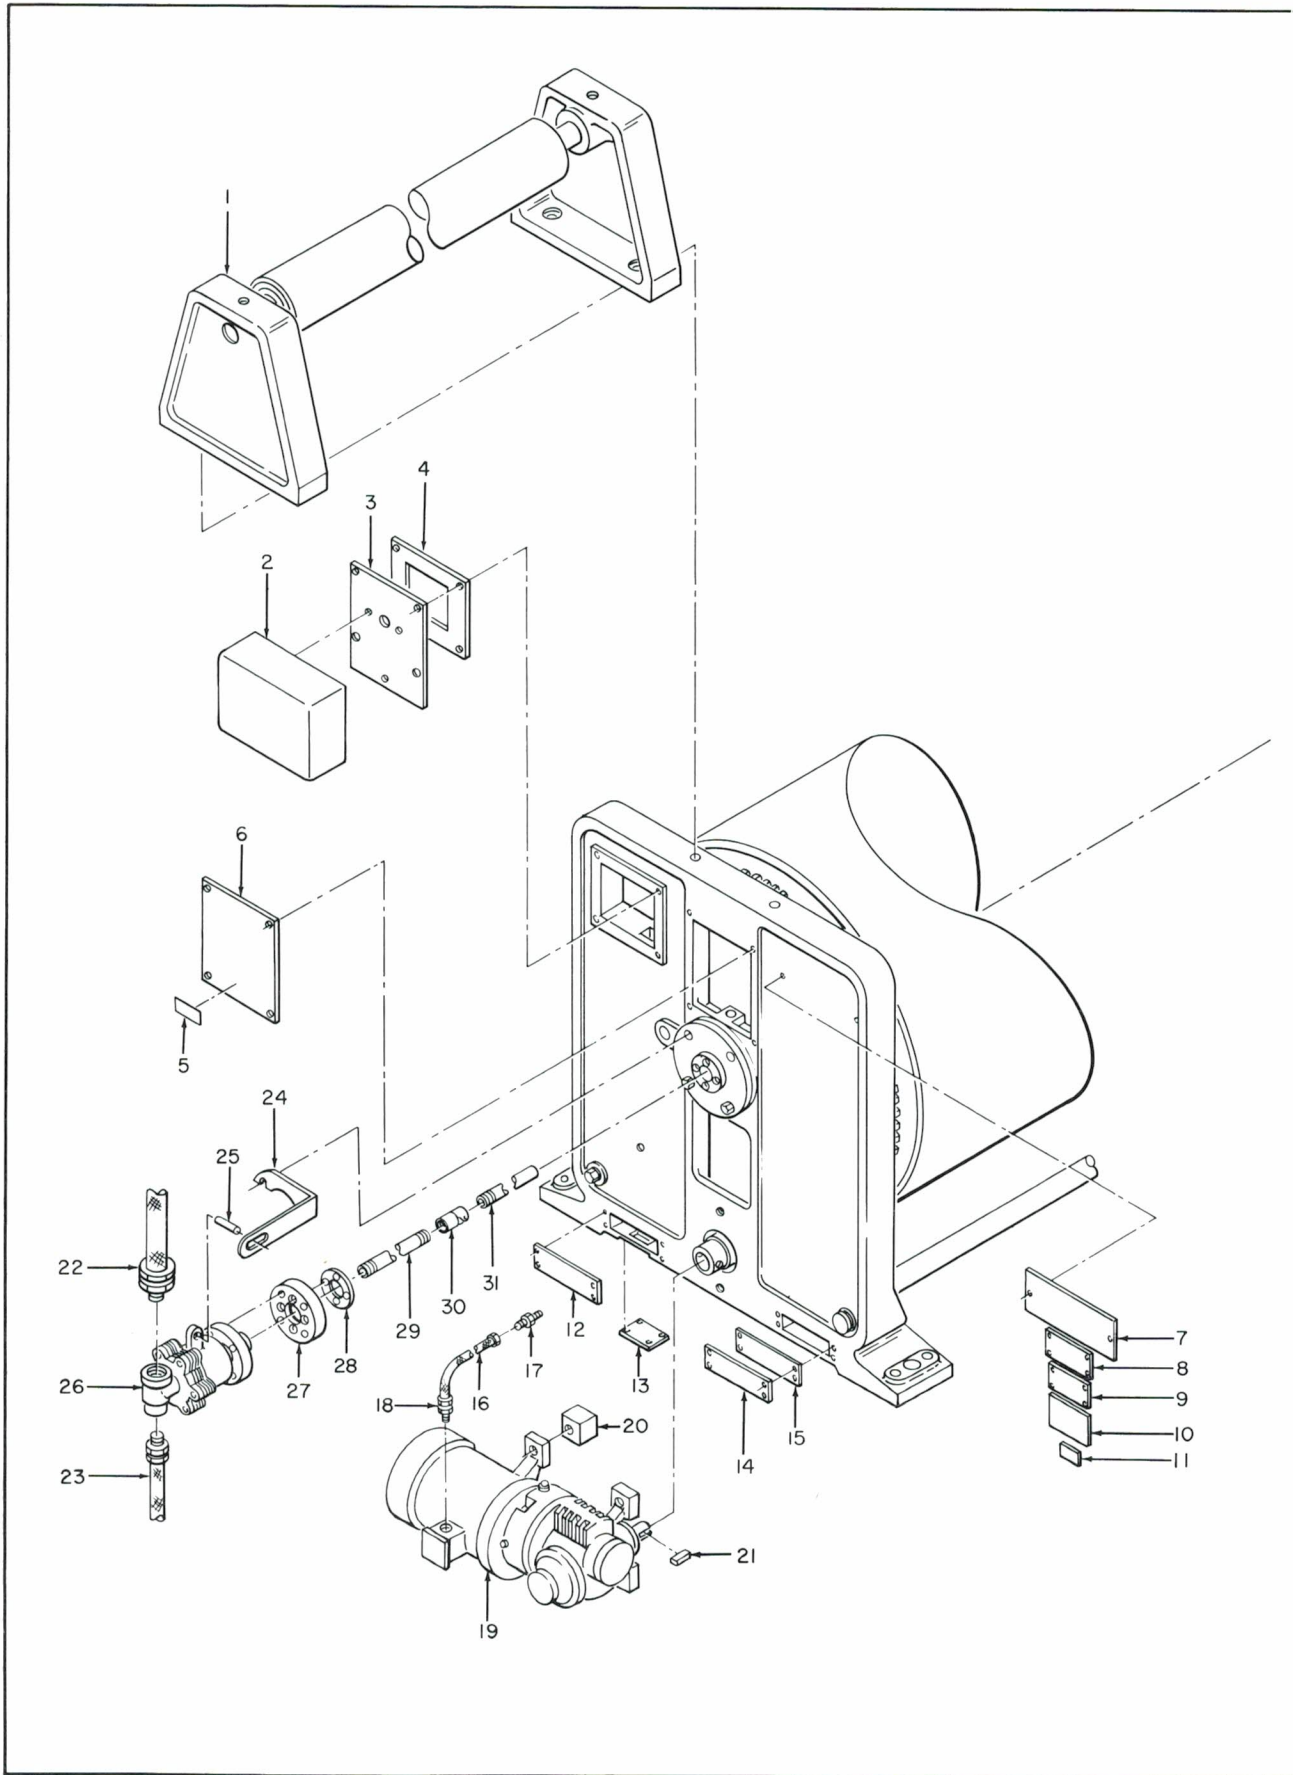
Model HCL Preheater Assembly (Sheet 1 of 2)
